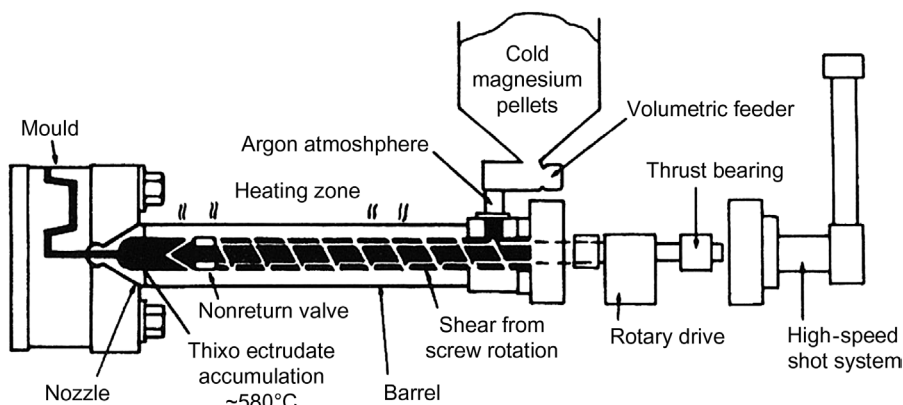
Schematic of a thixomold machine for producing die cast magnesium alloy components. Courtesy Thixomet Inc.
